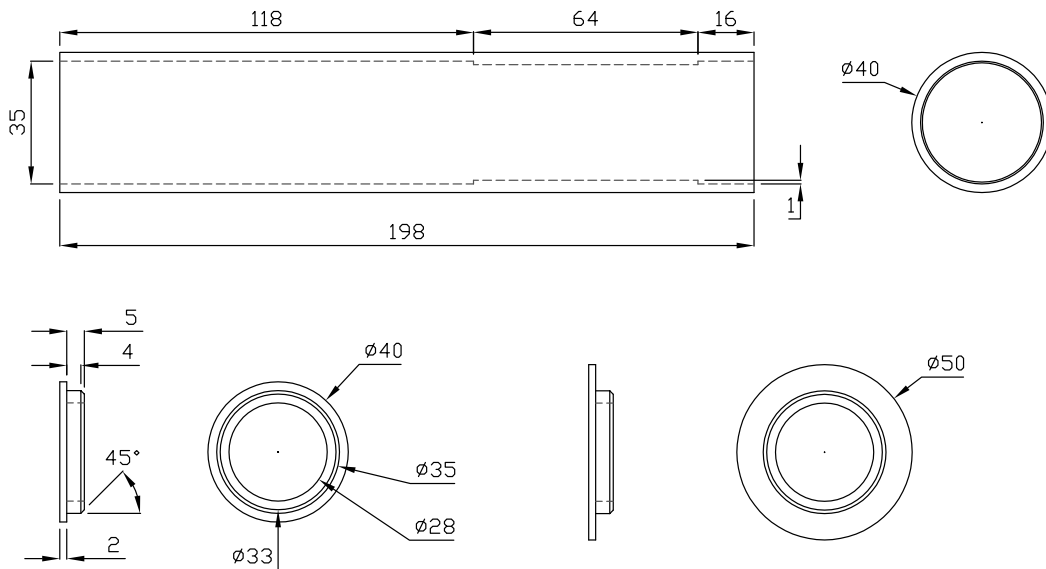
Cylinder and endplug dimensions. All dimensions in mm.
